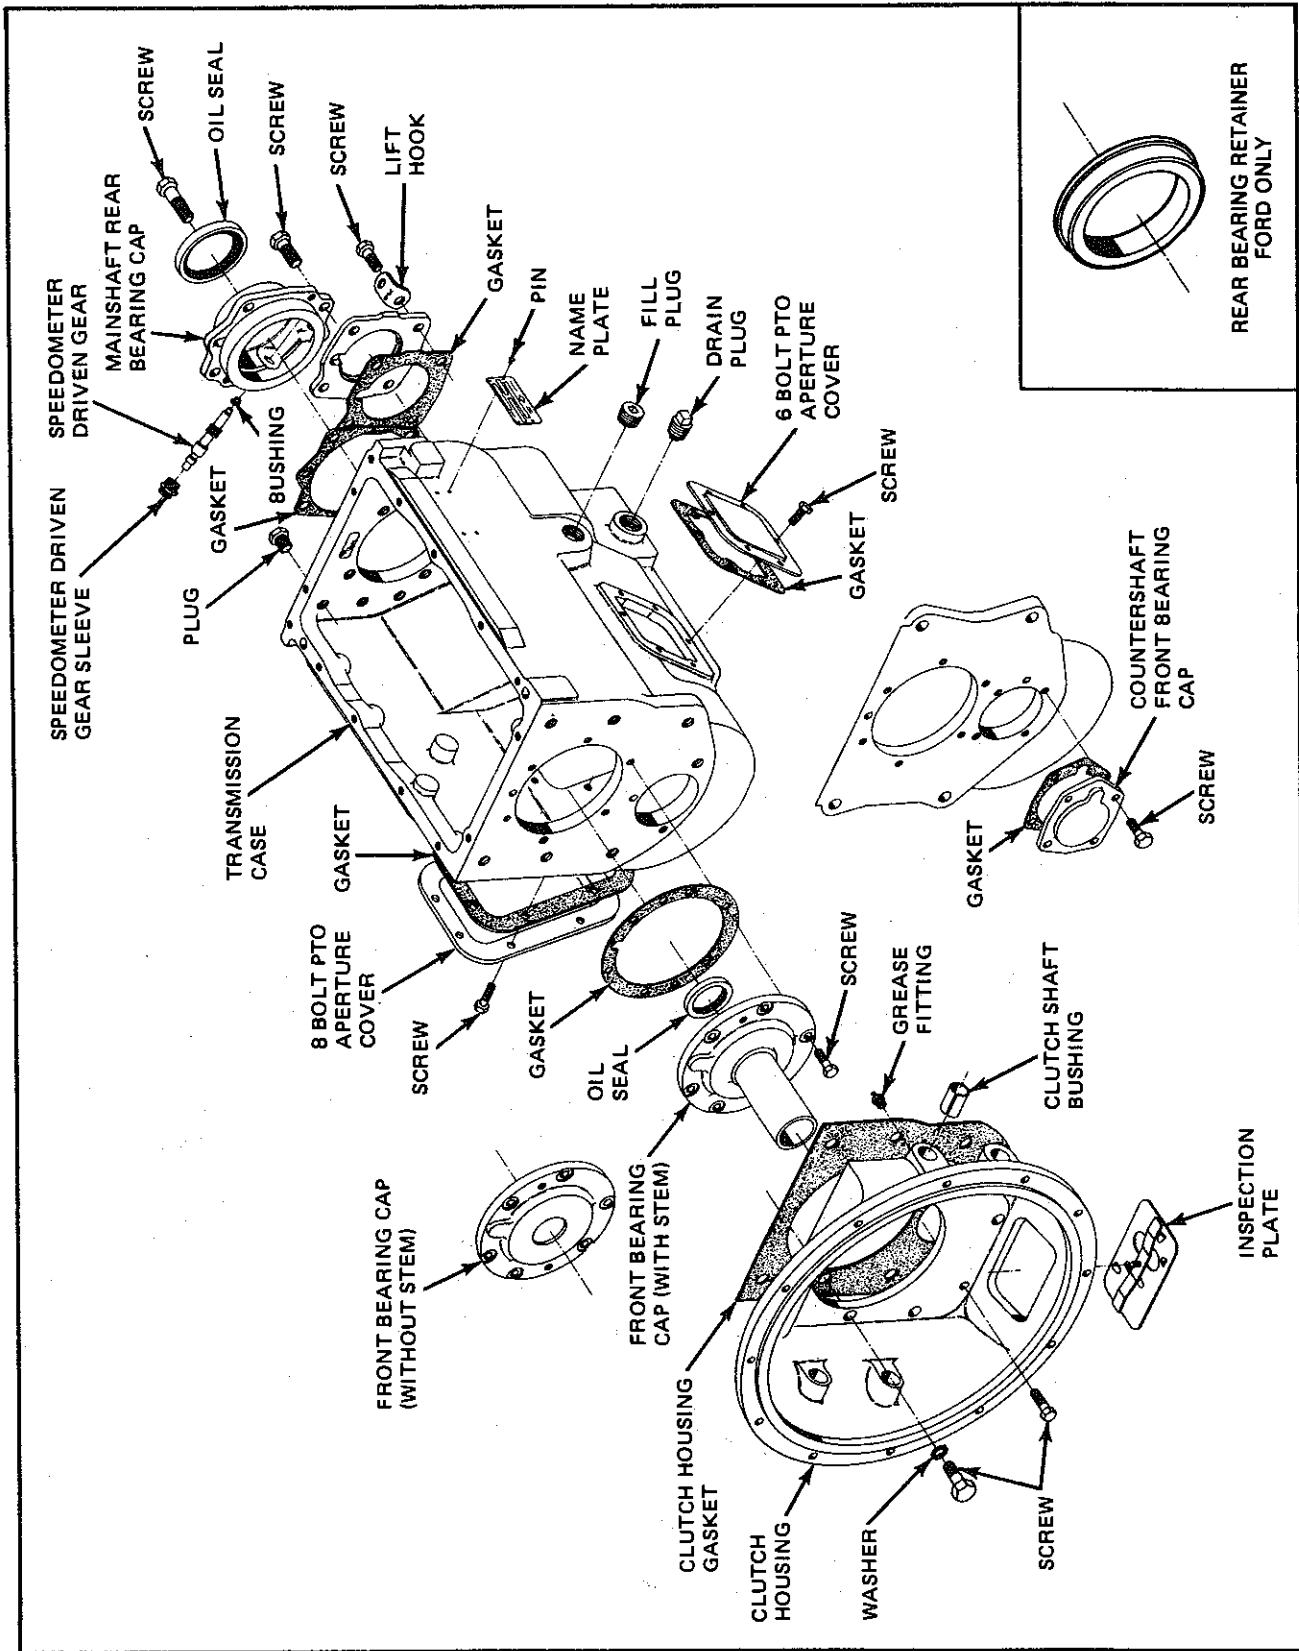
ES65-5 and CM60 Transmission Case, Bearing Caps and Related Parts
